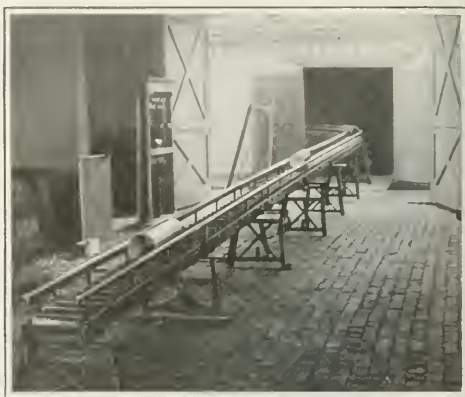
Mathews Gravity Carrier transporting Shell Forgings
